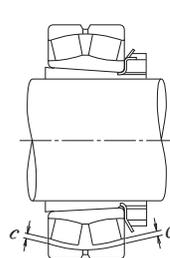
Clearance Measurement of a Spherical Roller Bearing
